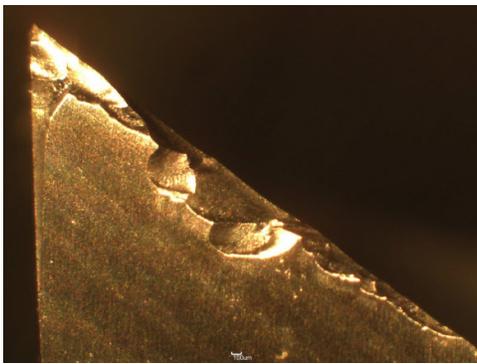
Tool flank wear for treatment 30 m/min and 0.25 mm/rev
